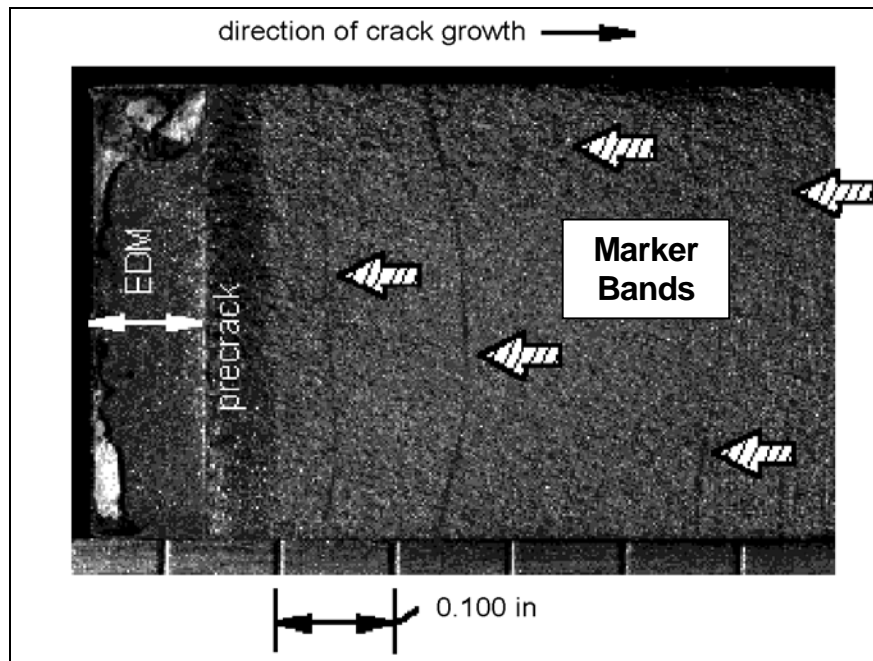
Marker Bands on Coupon Fracture Surface
